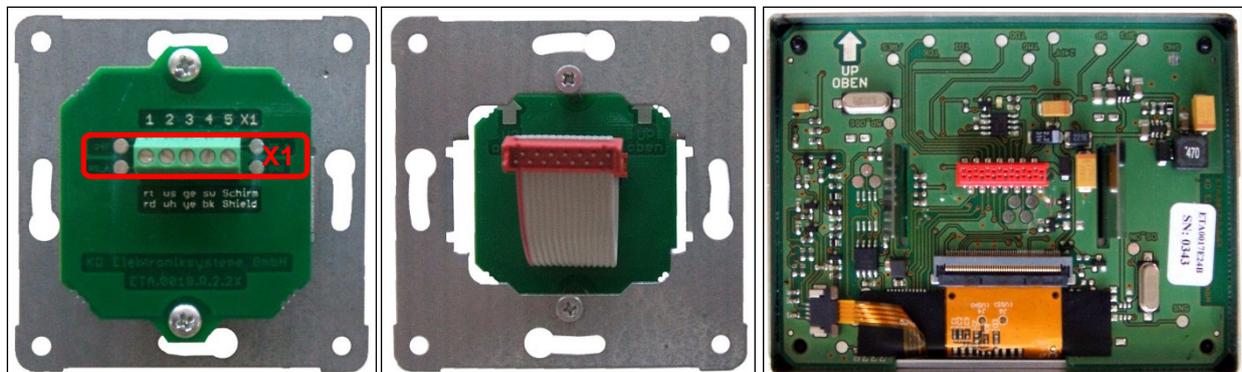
Connecting board with terminal X1 on a concealed base plate; ribbon cable to the connecting board; TFT control panel board (from left to right)
